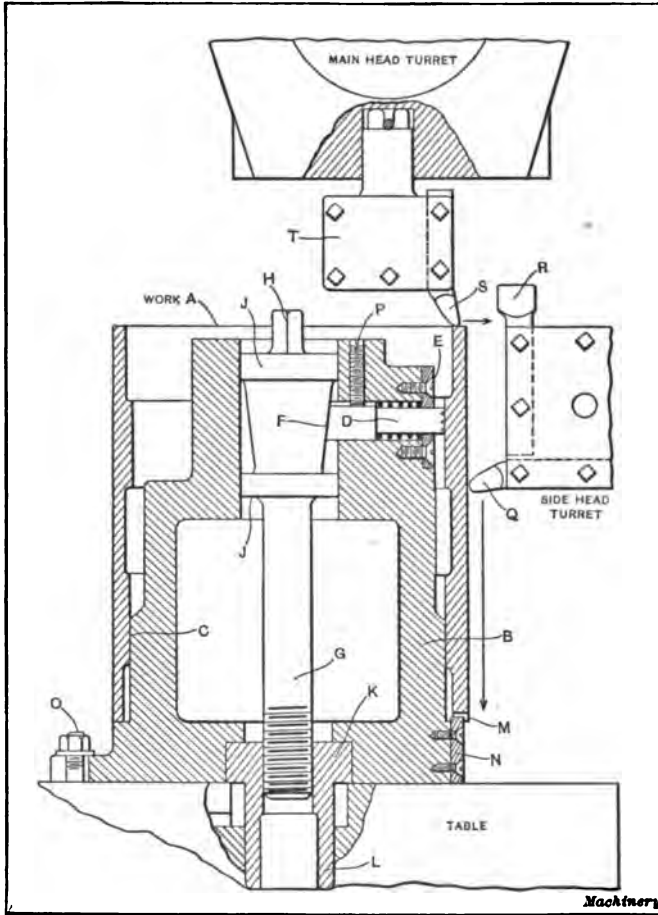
Second Setting for Machining Casting shown in Fig. 7
